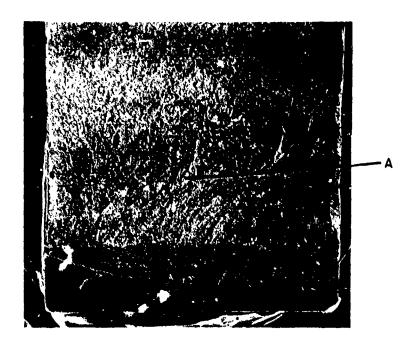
Fracture surface of an A-514 weld Charpy specimen tested at  $-196^{\rm O}{\rm C}$ , 8x.
